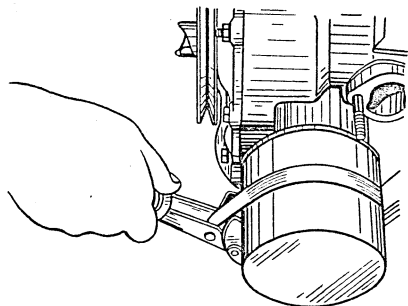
Removing the Oil Filter with Remover Tool A.60312
